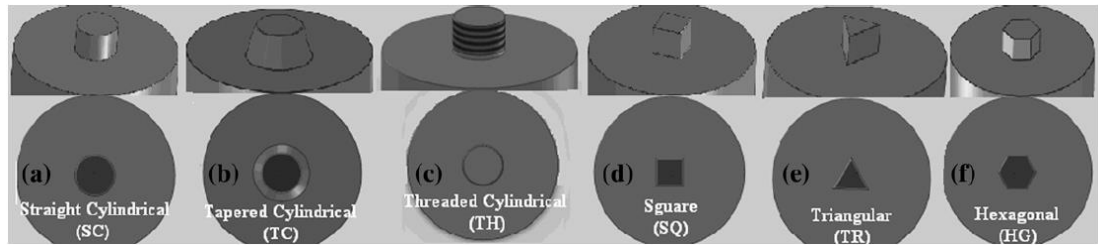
FSSW tool profiles: (a) straight, (b) tapered, and (c) threaded cylindrical, and (d) square, (e) triangular and (f) hexagonal [56].
